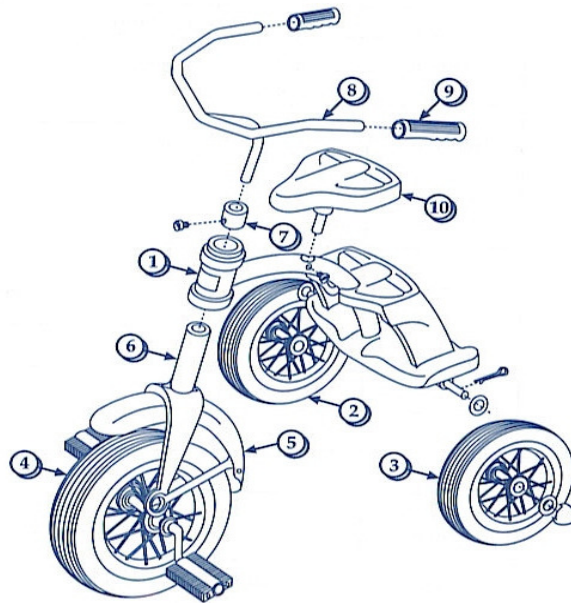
Example of Assembly Drawing (Schroeder 2000, 113)
